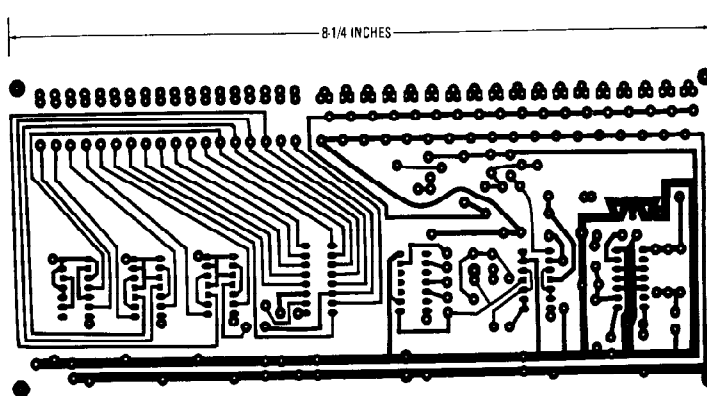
OZ PRINTED CIRCUIT BOARD SHOWN HALF-SIZE.
